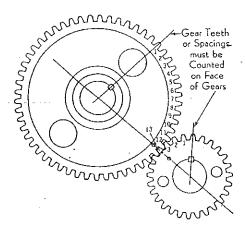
Valve timing on 228, 236, 248, 256 and 270 engines
